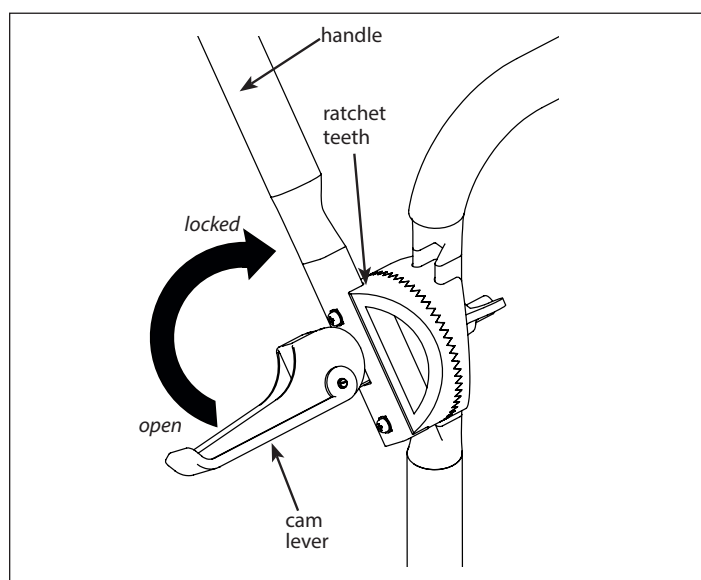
Adjusting the height of the handle. (Lever shown in OPEN position)
